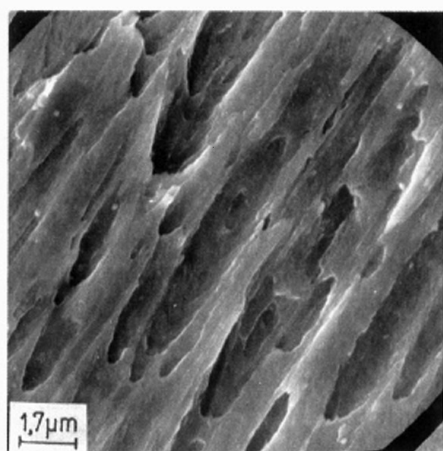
Ductile shear fracture surface of a specimen tested at room temperature.
